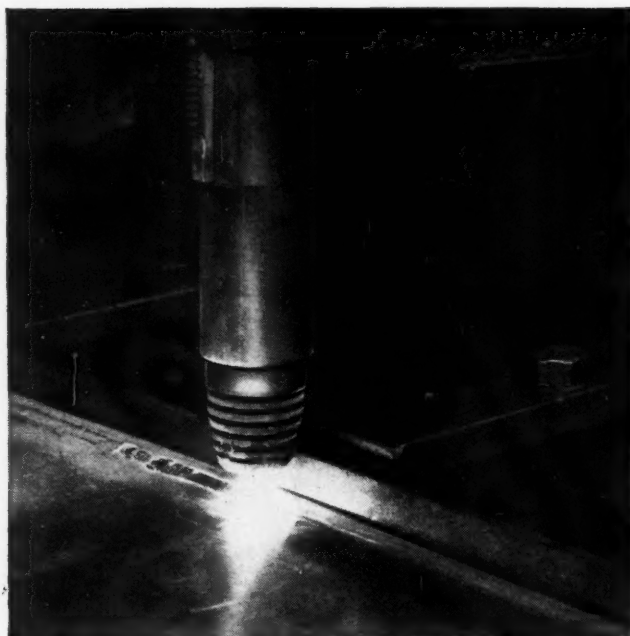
Tanks of Aluminum Sheet Welded by a Heliarc Torch Attached to Motor-driven Carriage
